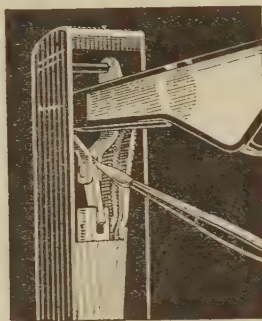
With this model Trafficator, apply a drop of thin machine oil to the two hinged joints between the arm and operating mechanism.
